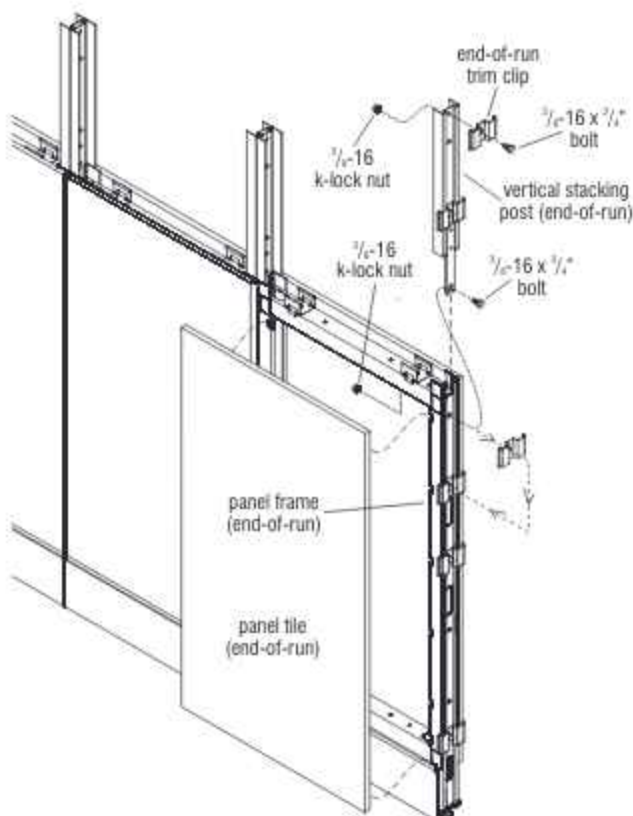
Stacking Sections - Top Cap & Trim Removal
